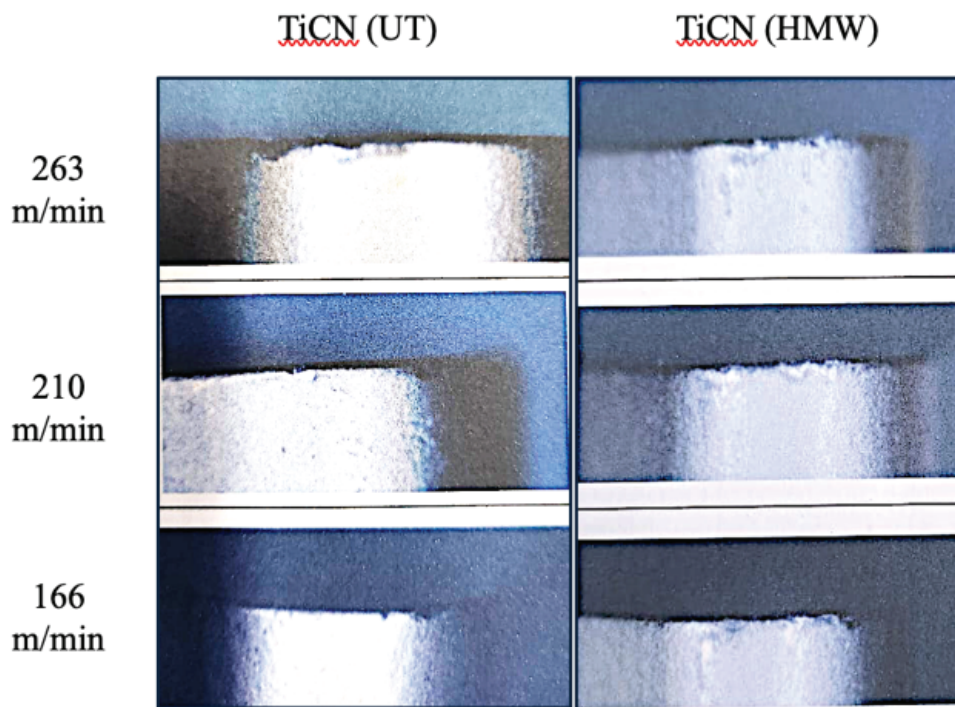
Flank wear of TiCN cutting tool in MQL machining
